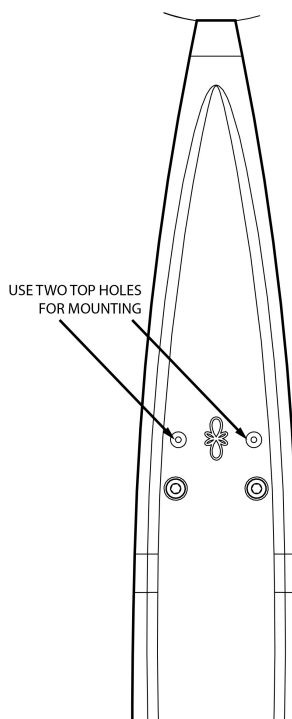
em64 M3 x 0.5 mm thread tapped mounting hole locations
